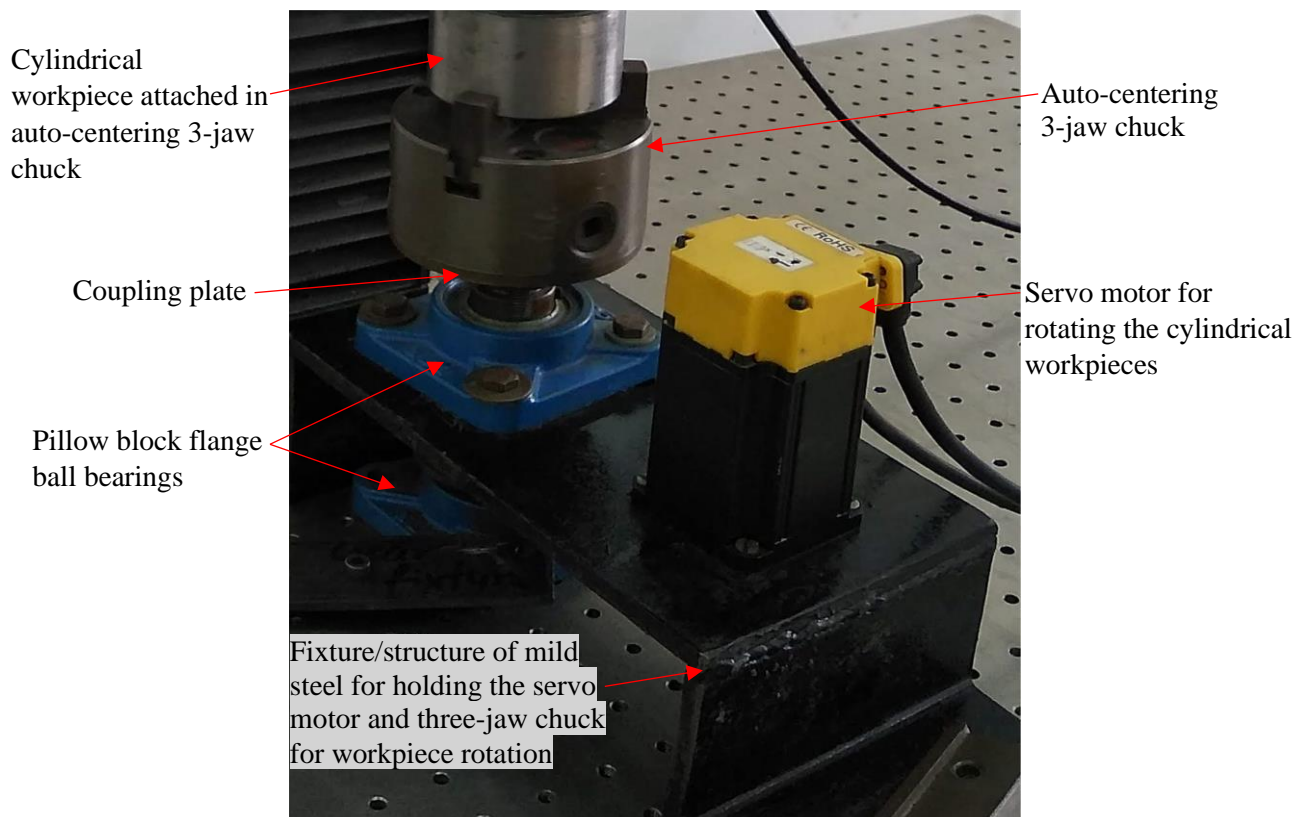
Fabricated improved fixture for holding and rotating the cylindrical workpieces of variable diameter.
